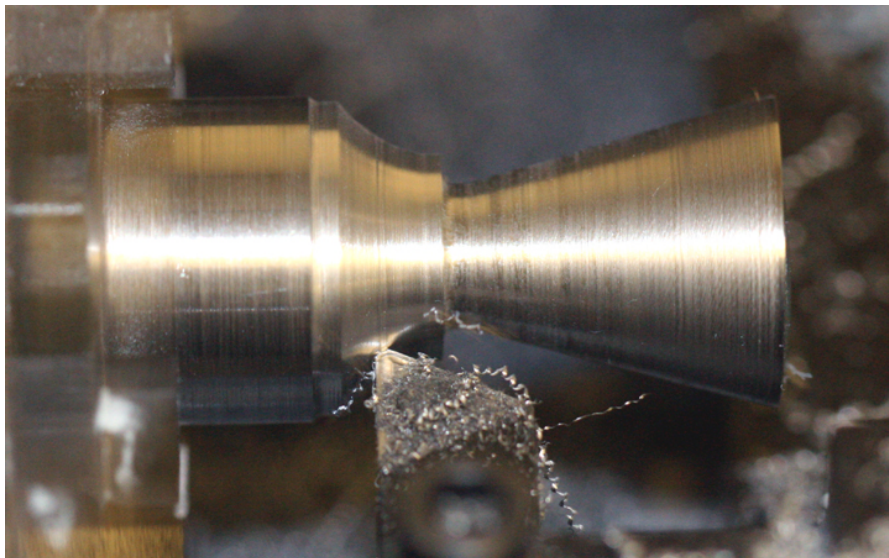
Nozzle throat curve machined on the CNC lathe.
